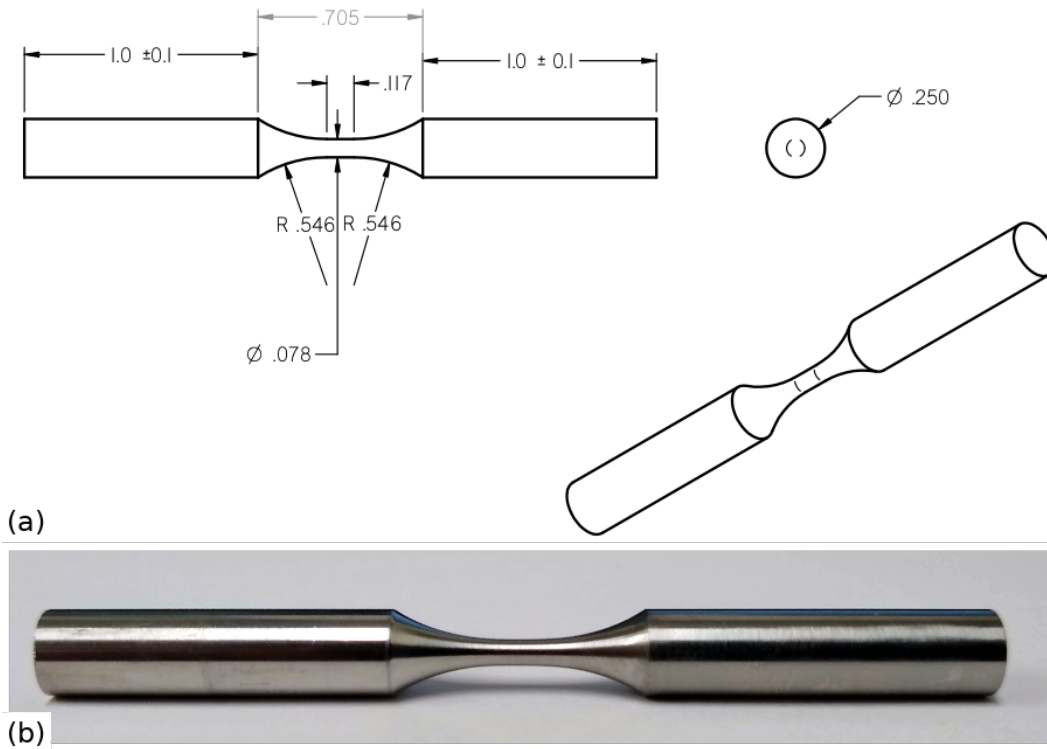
(a) Draft drawing of the fatigue test coupon to be used; dimensions are in inches, tolerances are generally ± 0.0002 inches unless otherwise marked. Roughly a miniaturized ASTM E606 standard test geometry. (b) A machined test coupon
